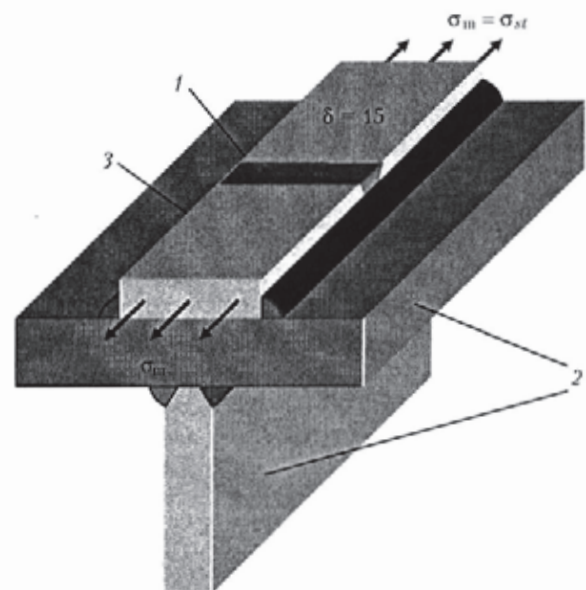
Schematic of longitudinal connection of flat car frame with reinforcement in the form of a cover strip with one-sided butt weld: 1 – one-sided butt weld; 2 – longitudinal connection of frame; 3 – reinforcing cover plate
